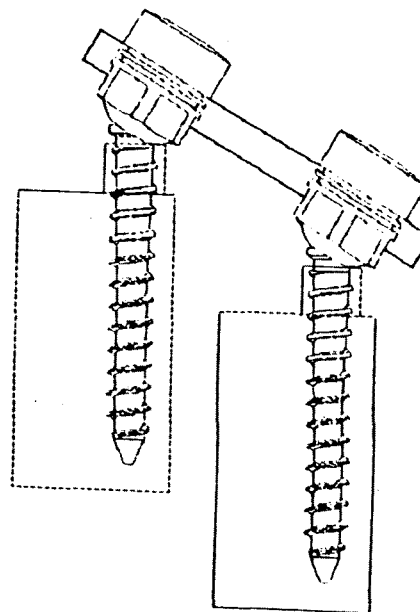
Articulating screw heads accommodate the insertion of the rod non-perpendicular to the screw shanks.
